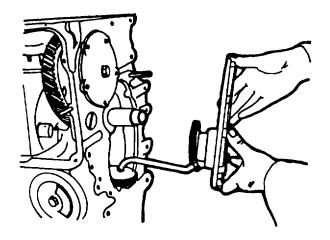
Mounting Front Cover with Lube Oil Pump
